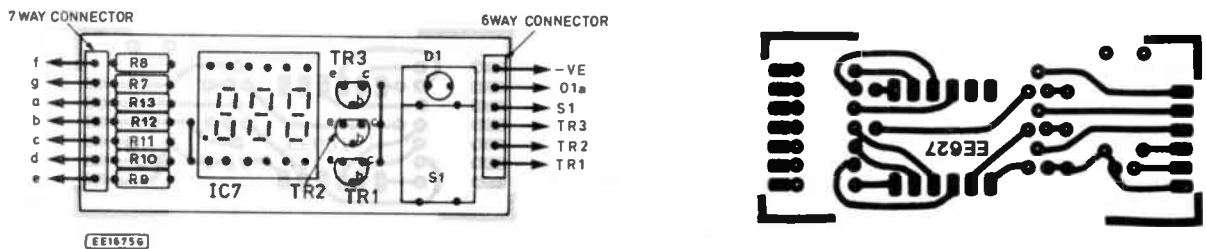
Component layout and full size copper foil master pattern for the Display board.
